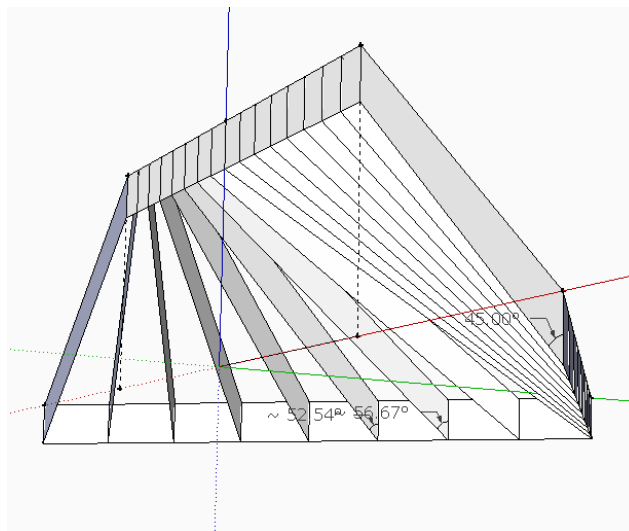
Measure required miter-gauge angles using the angular-dimension tool
